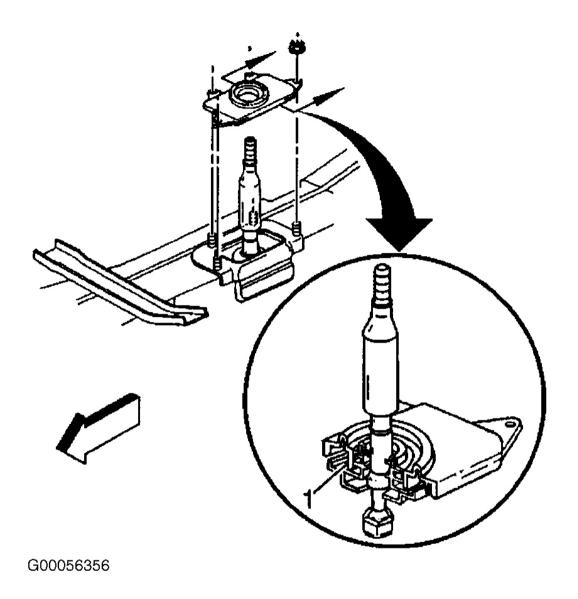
Removing/Installing Shift Control Closeout Boot Courtesy of GENERAL MOTORS CORP.
